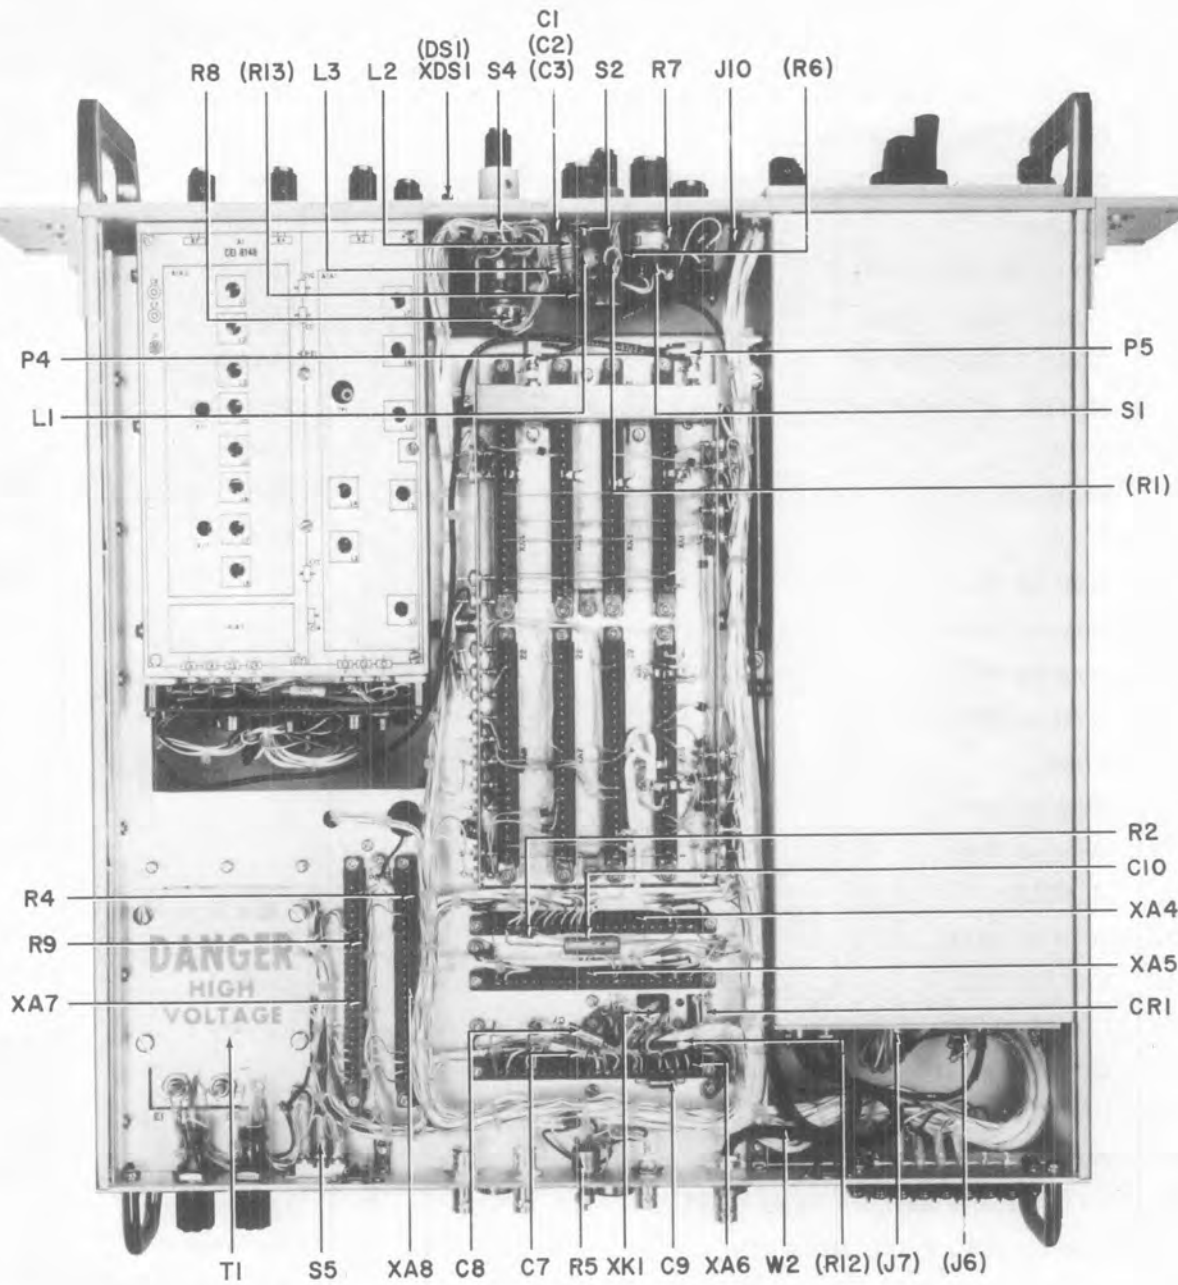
Type 560 Receiver, Bottom View, Component Locations
